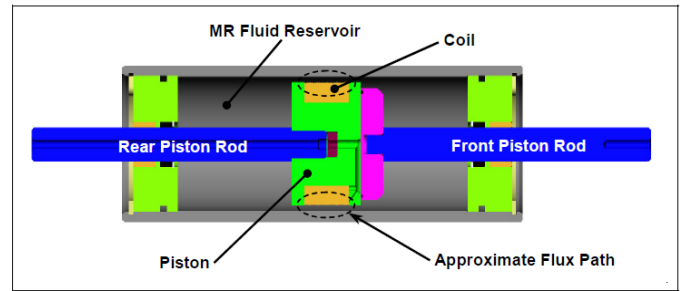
Proposed and Developed Single Tube- double Ended MR Fluid Damper [8]
